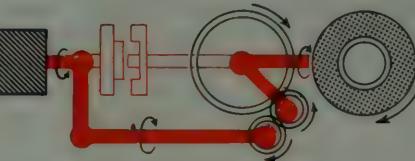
3RD GEAR (DIRECT CONNECTION BETWEEN DRIVING SHAFT AND DRIVEN SHAFT)
